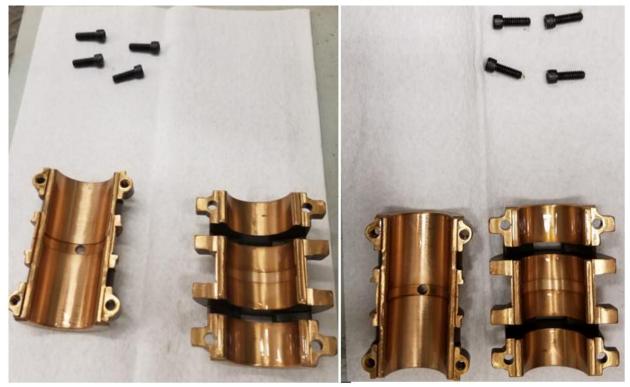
Visual inspection of the bearing before (left) and after (right) the bearing test for the motor end
